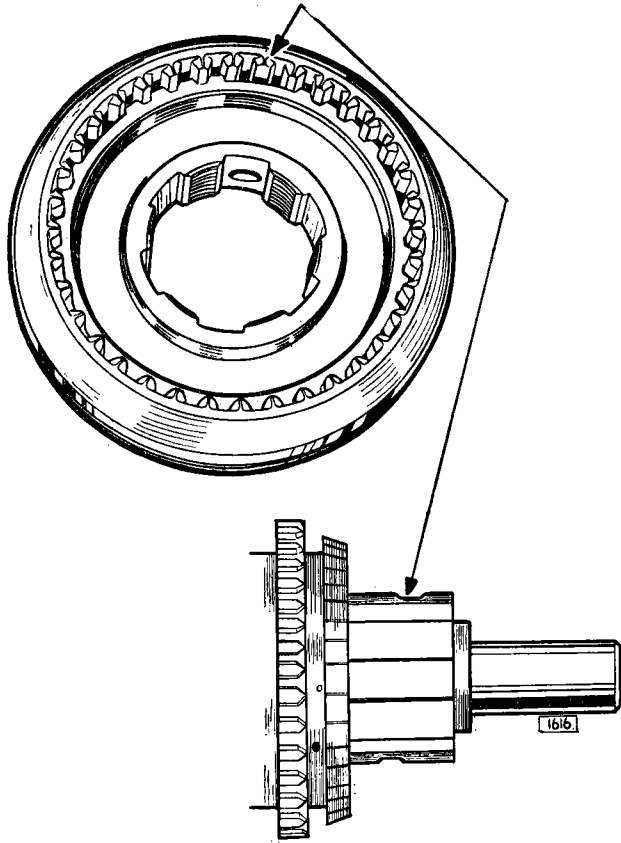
The relieved tooth at the wide chamfer end of the outer operating sleeve must be in line with the foremost groove in the mainshaft
